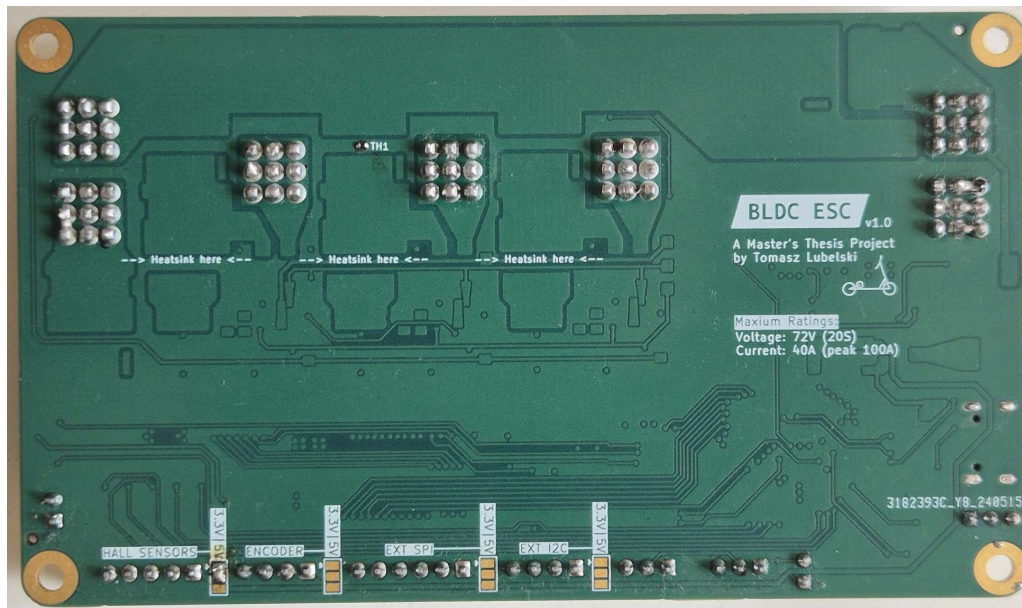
Assembled PCB of the designed ESC – bottom side
